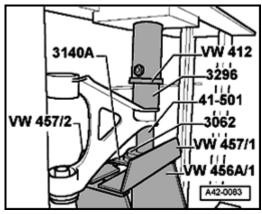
Pressing bonded rubber bushings out of upper control arm
